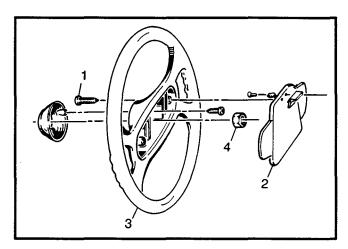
STEERING WHEEL AND SCORECARD HOLDER
